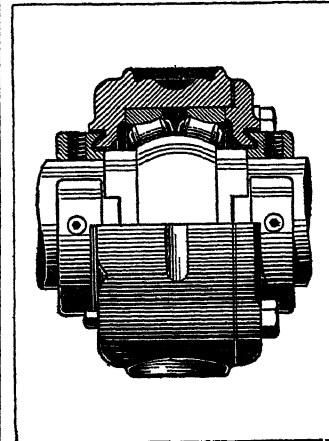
SHAFFER ROLLER BEARING, SHOWING INNER RACE WITH SPHERICAL FORM FOR PRODUCING A SELF-ALIGNING EFFECT
